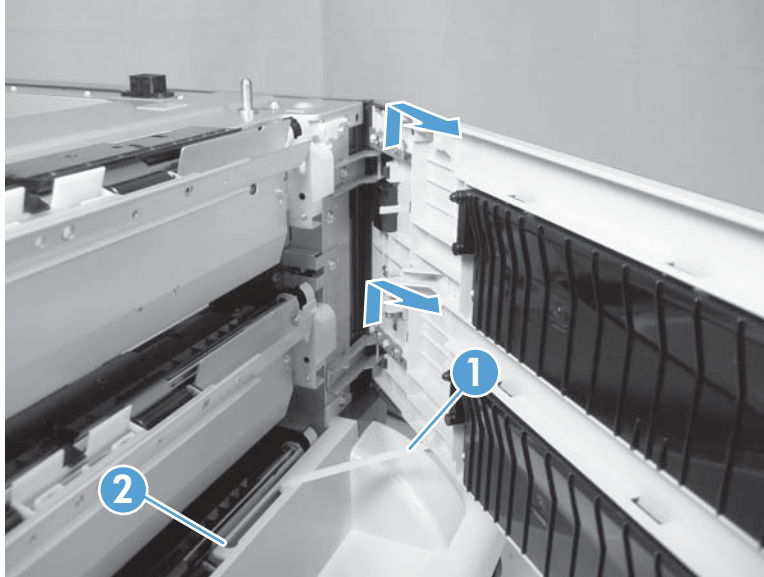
Remove the 3x500 right-door assembly (2 of 3)
